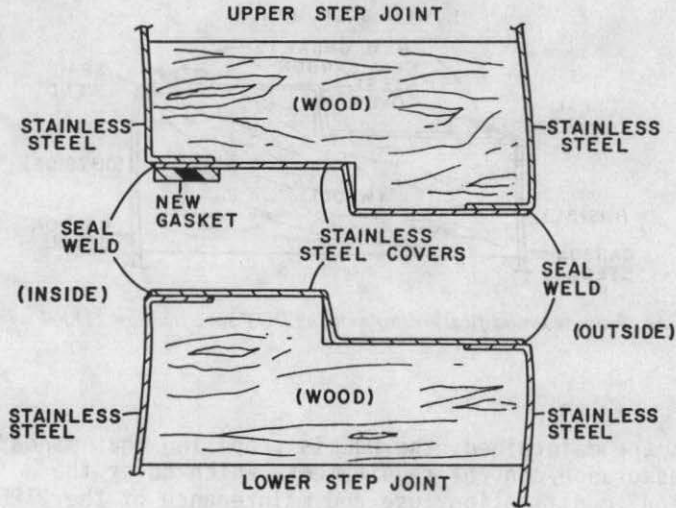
Proposed modification to new DOT specification 21PF-1 overpacks.
